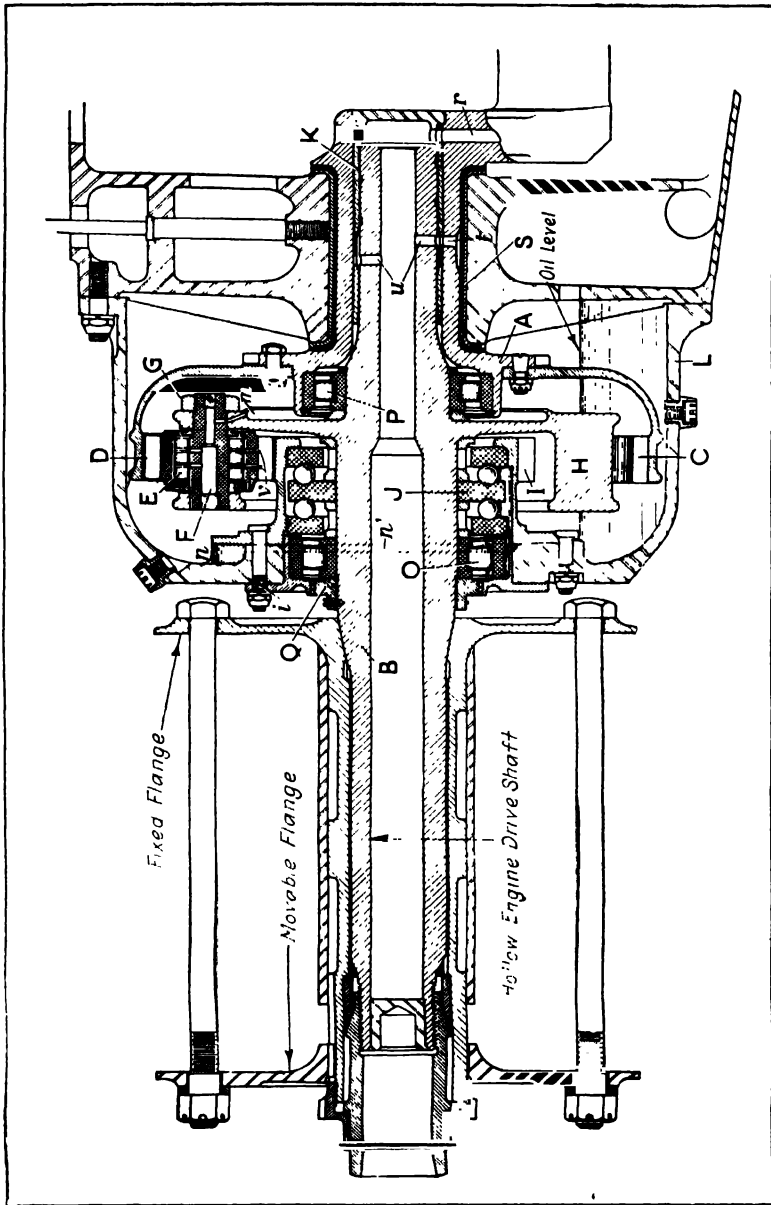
Sectional Diagram Showing Construction of Lorraine Epicyclic Speed Reducing and Propeller Drive Gear.
